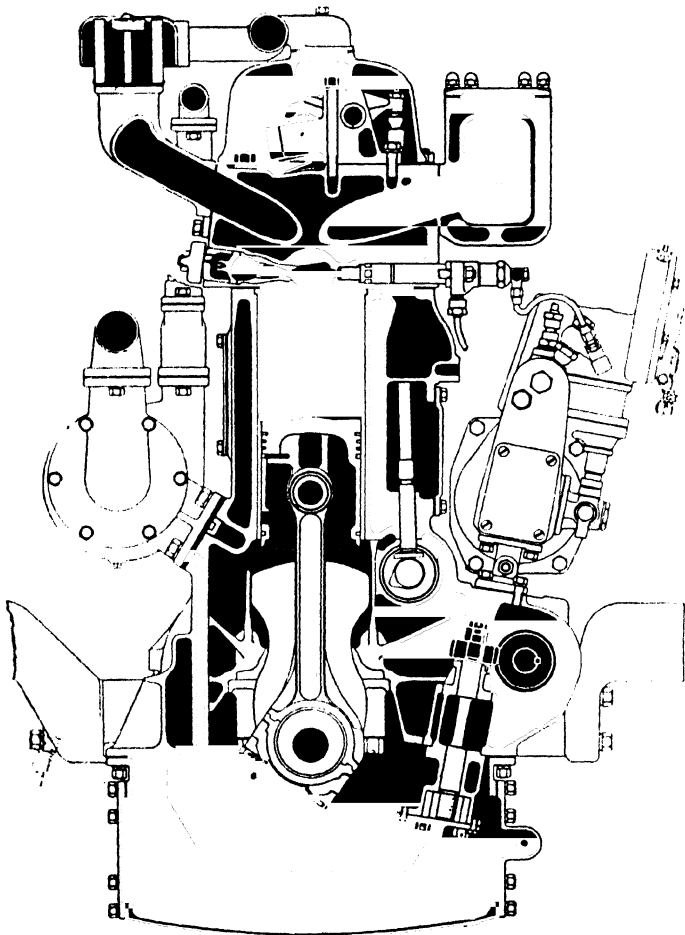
Mack-Lanova (air-cell) marine Diesel engine. This engine is typical of high-speed marine and automotive designs. Several American engines employ the Lanova combustion system. It has "dry"-type cylinder liners.
